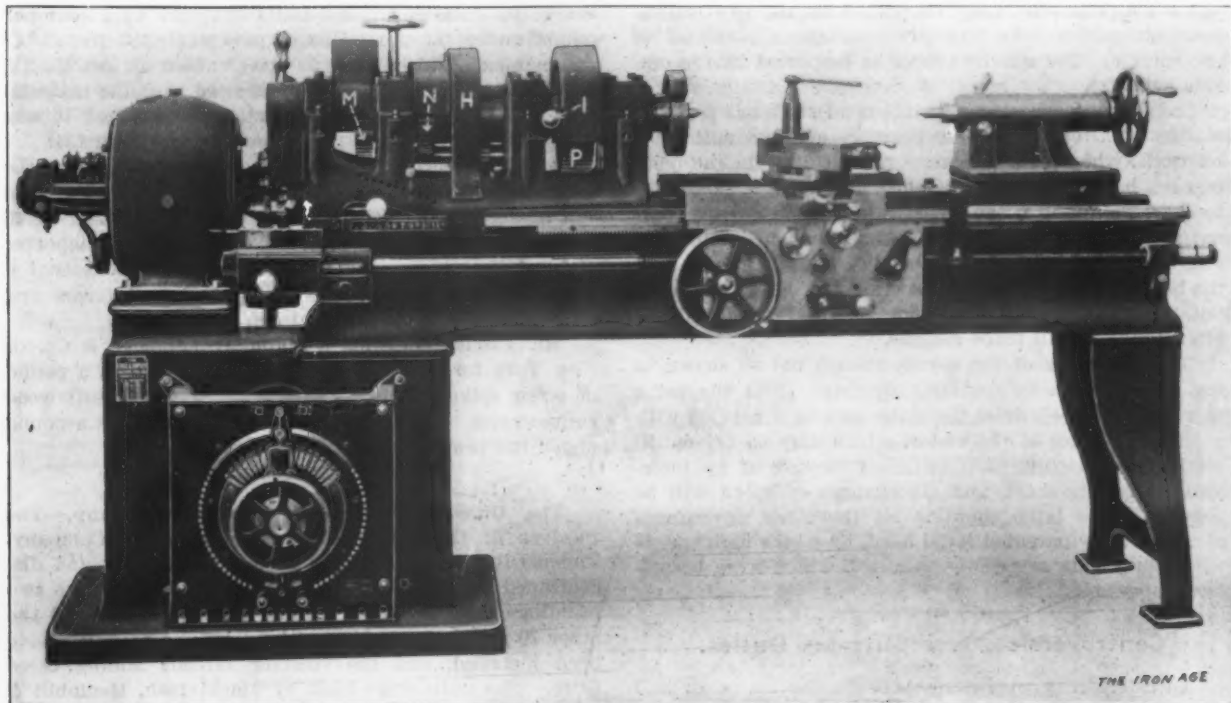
New Electrically Driven Lodge & Shipley Lathe.
